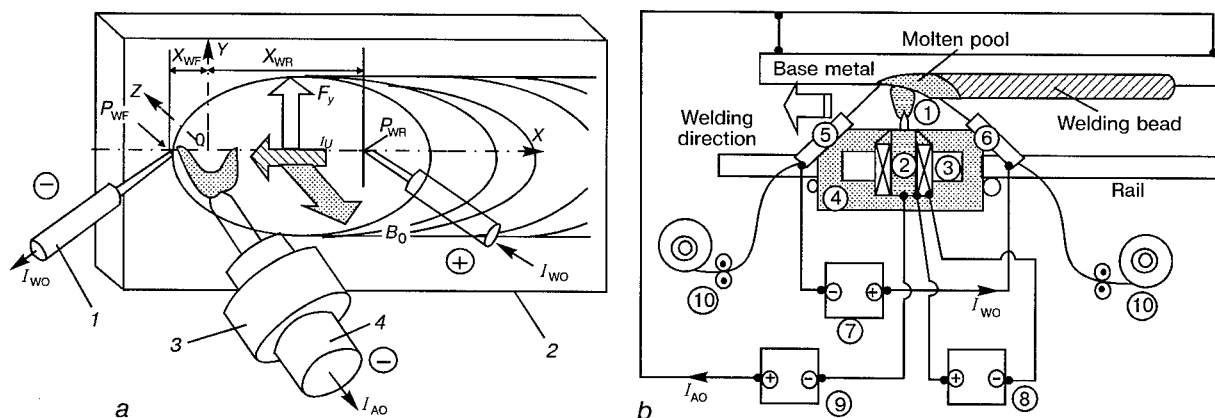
Schematic diagram of Two Wires TIG welding process with ECMP: *a* – weld area, position of welding torch, magnetic coil and filler wires (1, 2 – front and rear wires, respectively, 3 – reel; 4 – torch); *b* – scheme of process of horizontal Two Wires TIG welding with ECMP (1 – arc; 2 – TIG welding torch; 3 – magnetizing coil; 4 – carriage; 5, 6 – front and rear wires; 7 – wire heat source; 8 – device for magnetizing; 9 – welding power source; 10 – wire feeding mechanism)
